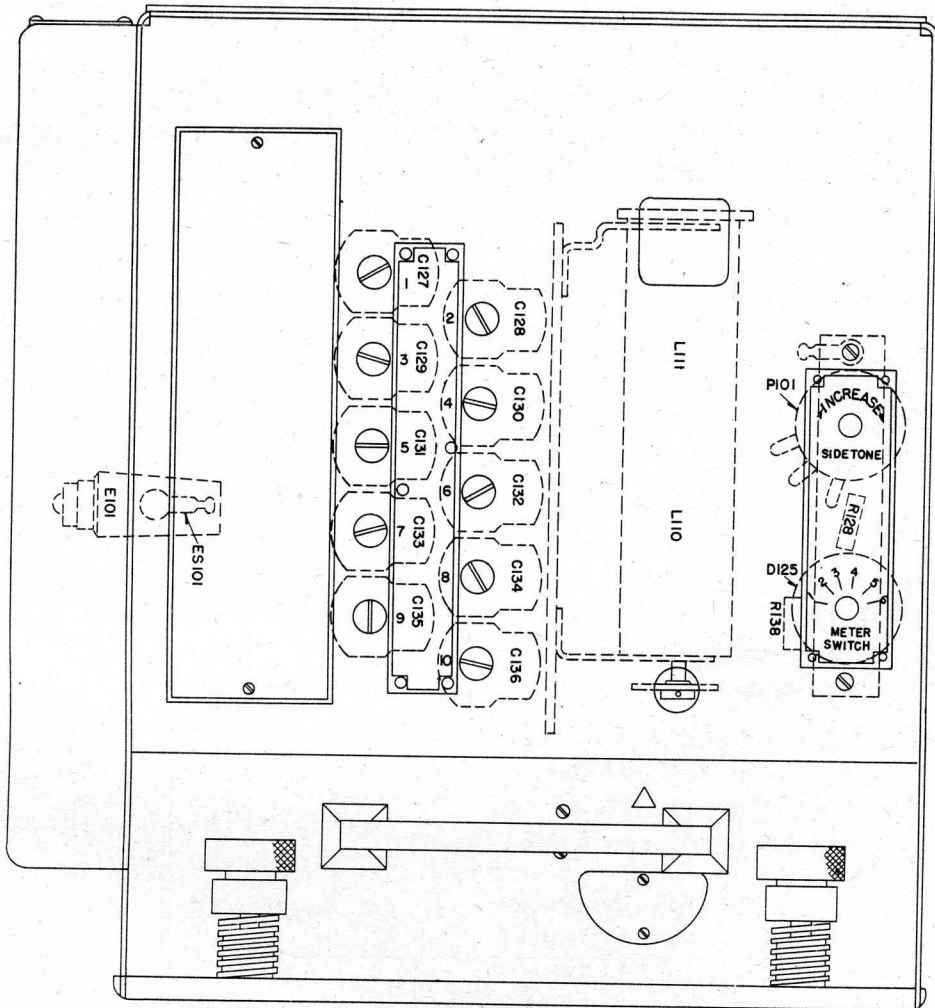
Radio Transmitter BC-684-A: Apparatus Location Diagram, End View and Detail Through Section A-A
